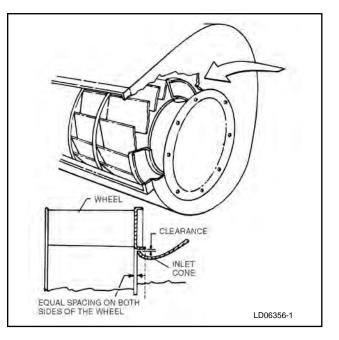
AIRFOIL WITH CONE ASSEMBLY
